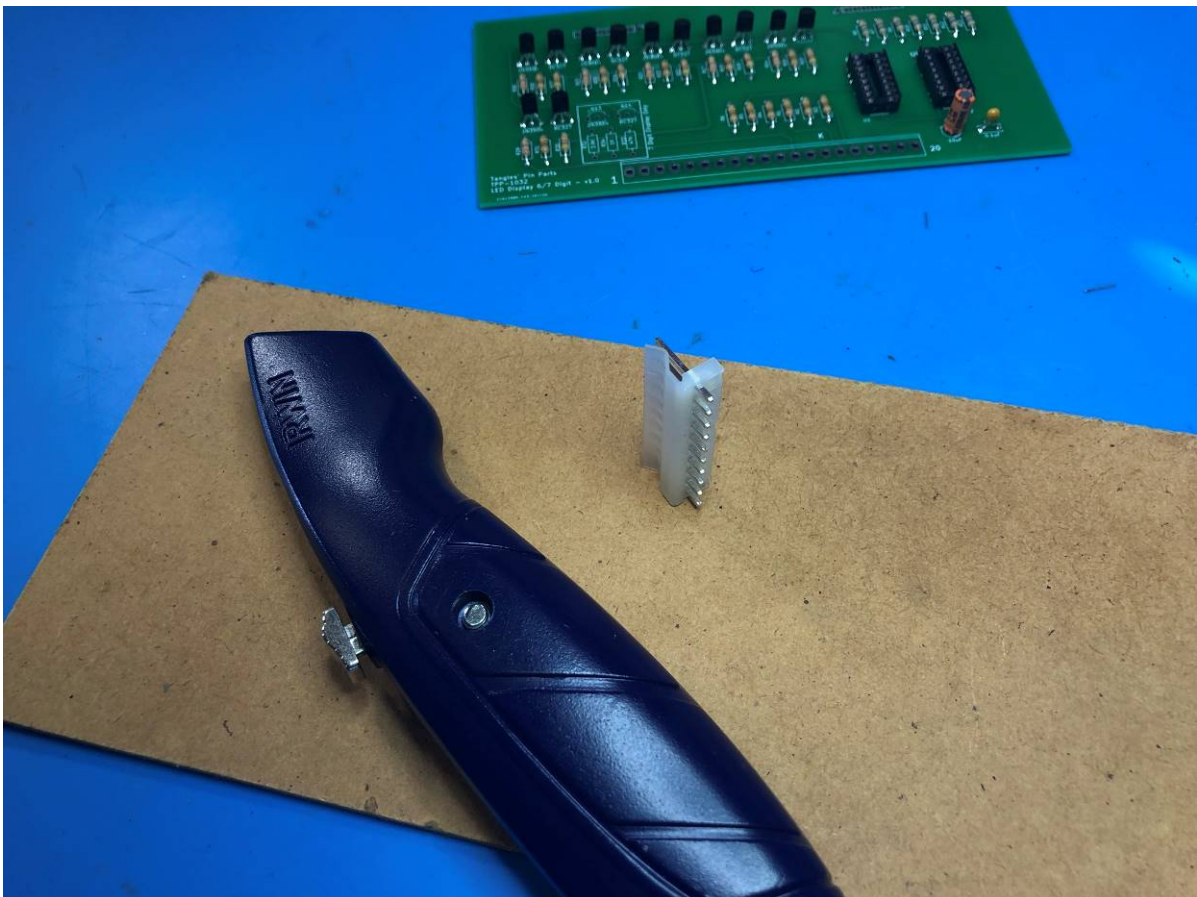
Preparing to Cut the retaining wall off the 10 Way connectors
